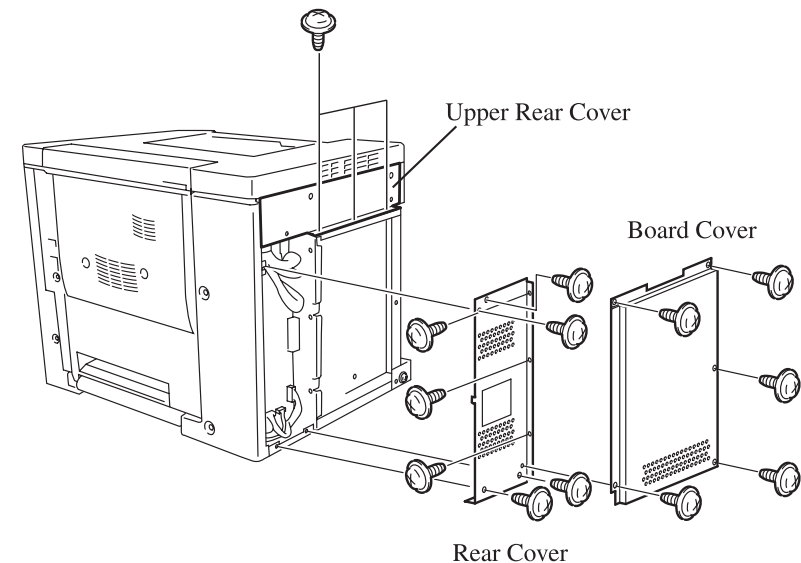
Removing the Rear Cover and Upper Rear Cover
